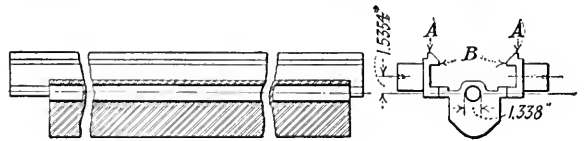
LONGITUDINAL SECTION AND END ELEVATION OF FORGING
